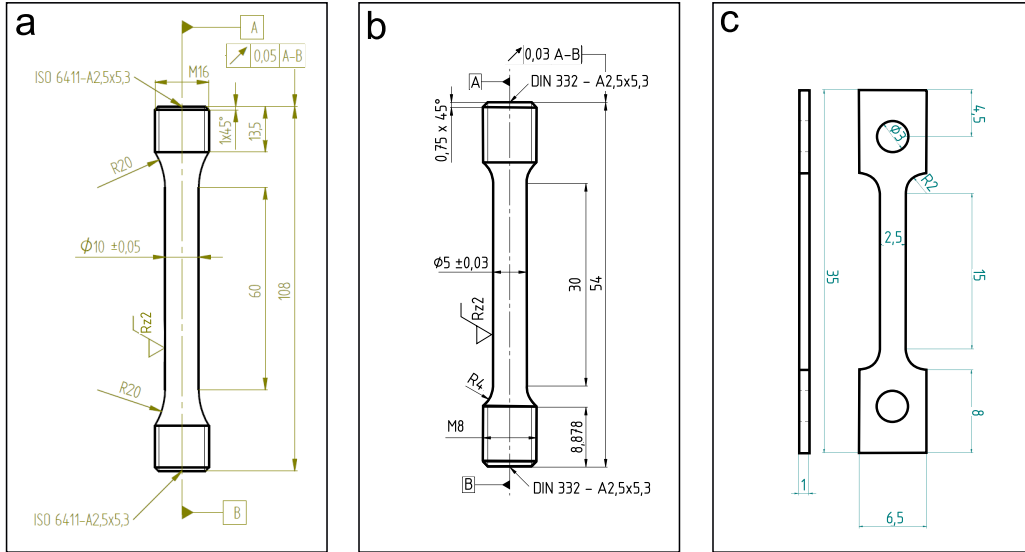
Drawings of tensile specimen geometries: (a) standard geometry with cylindrical gauge section, a diameter of 10 mm and $L_c = 60$ mm [143], (b) reduced cylindrical gauge section, a diameter of 5 mm and $L_c = 30$ mm, (c) miniature geometry with flat gauge section, a thickness of 1 mm thickness, a width of 2.5 mm and $L_c = 15$ mm.
